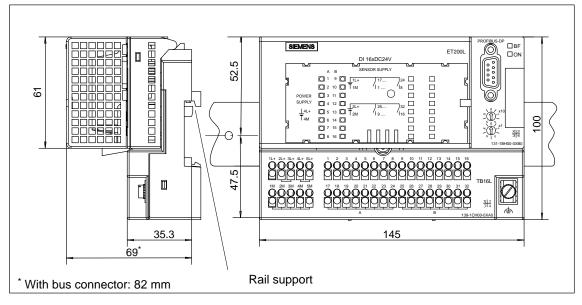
The TB 16L Terminal Block with the Electronics Block Clipped On, Dimension Drawing
